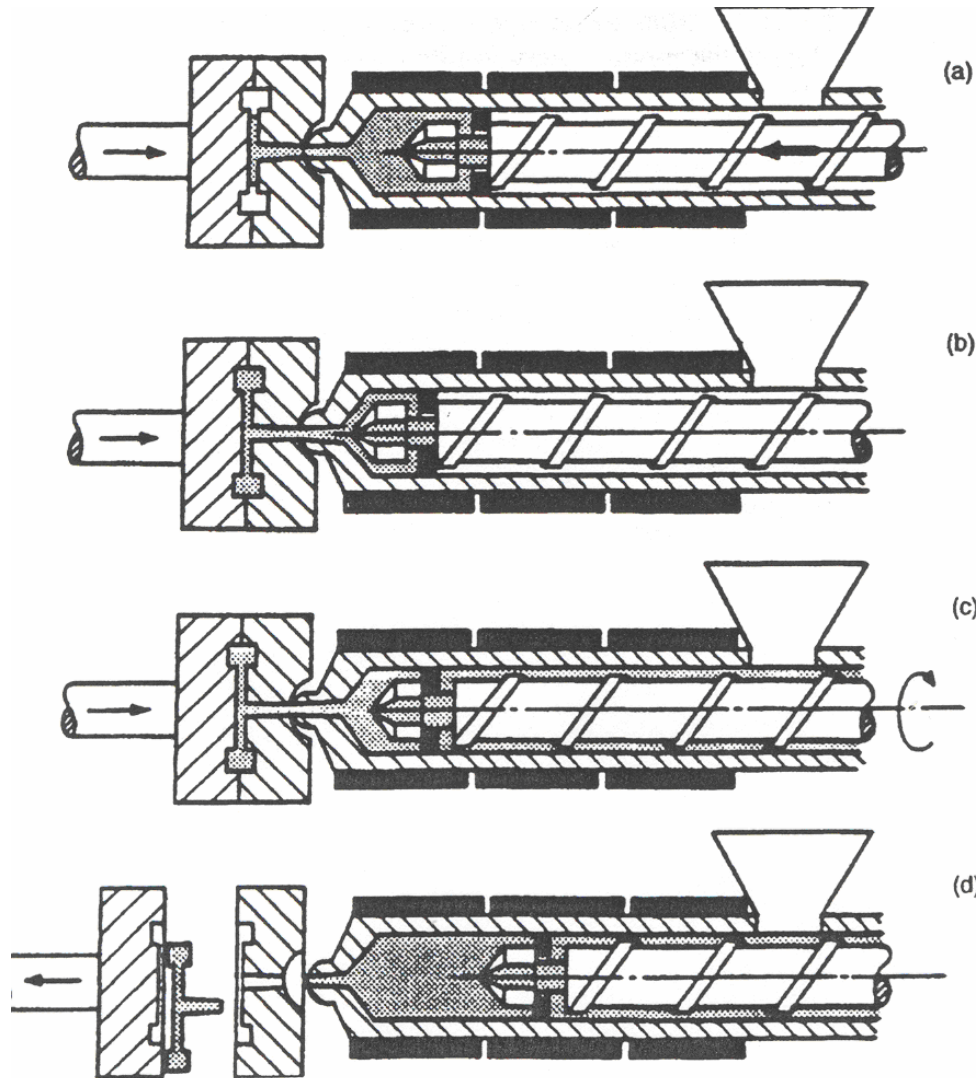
Typical cycle in reciprocating screw injection moulding machine
